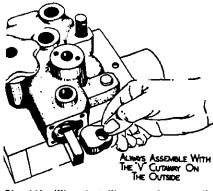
When installing cam in cam stirrup, position "V" cutout as shown.
